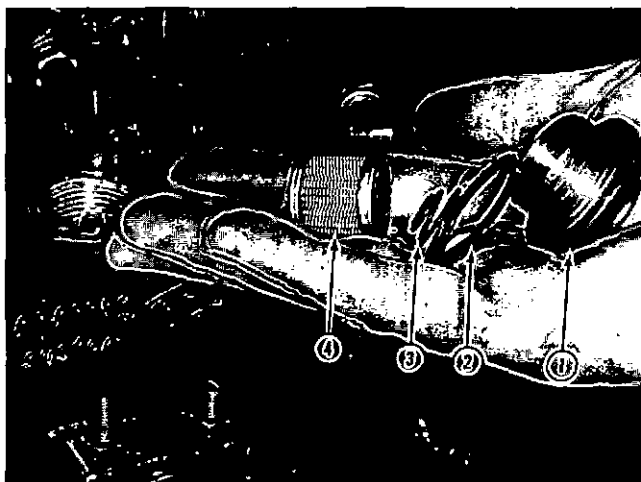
, N11950. Fuel pump filter assembly — PT (type G) fuel pump
